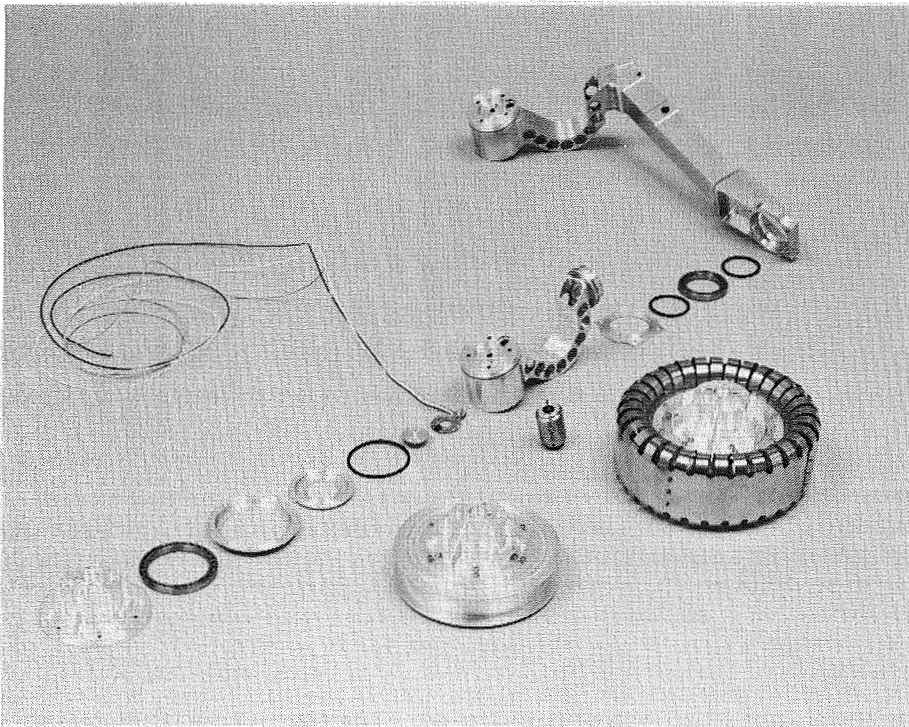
Photograph of the bogie assembly showing all of the parts for one wheel drive mechanism.
